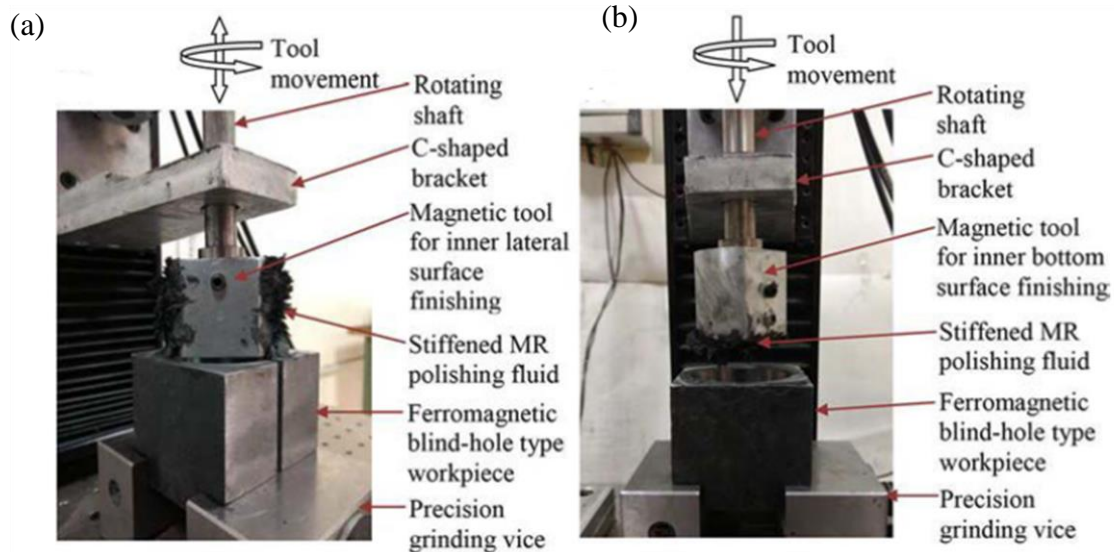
(a) MR lateral finishing tool surface and (b) MR bottom finishing tool surface for the finishing of cylindrical blind hole type workpiece (Bedi and Singh, 2018b).
